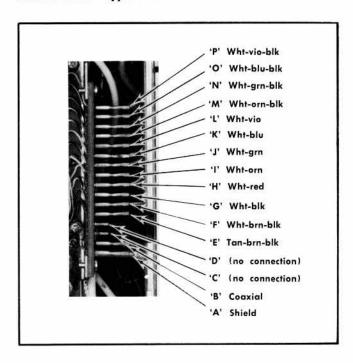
Wire and cable color code to the honeycomb pin connectors.
